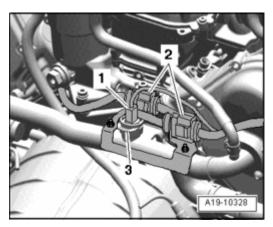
Disconnecting Electrical Harness Connector At Engine Coolant Temperature (ECT) Sensor
